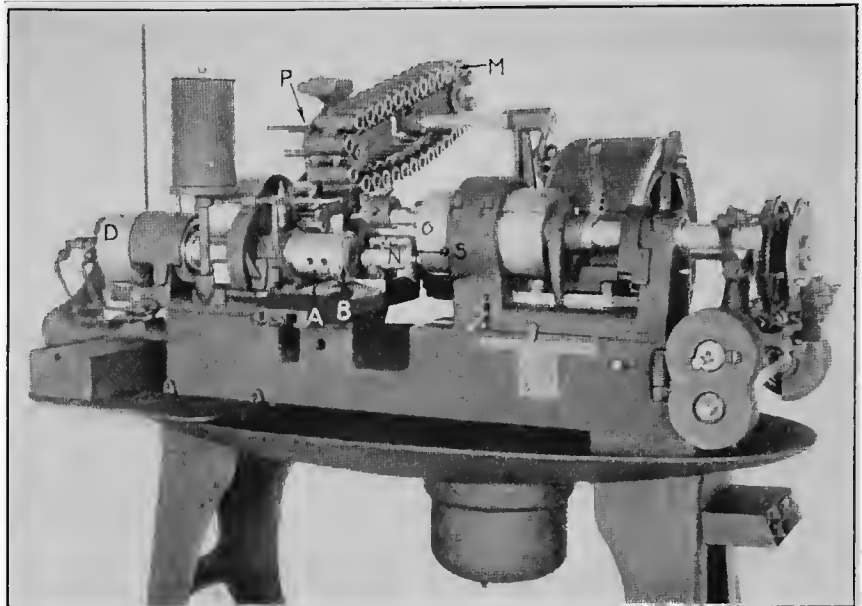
MACHINE EQUIPPED WITH MAGAZINE AND PNEUMATIC CHUCK FOR PRODUCING FUSE BODIES AND FUSE CAPS
